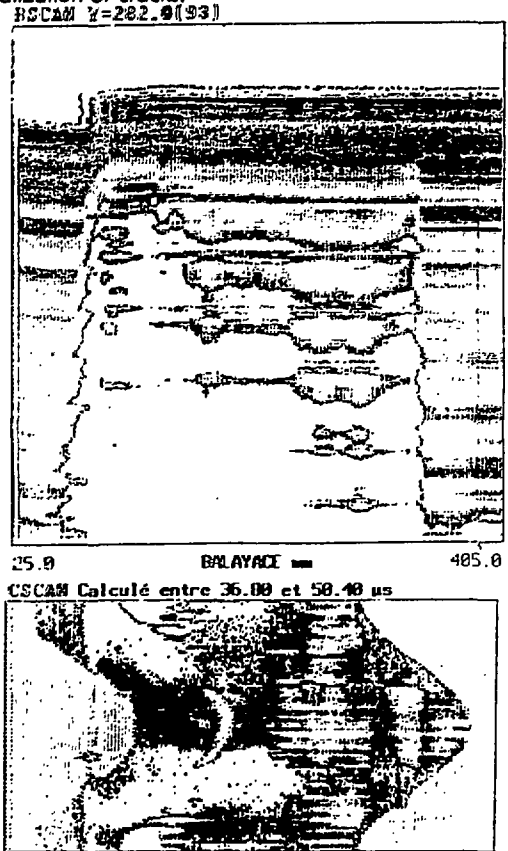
PRESSURE HEAD PENETRATION U.T.INSPECTION
